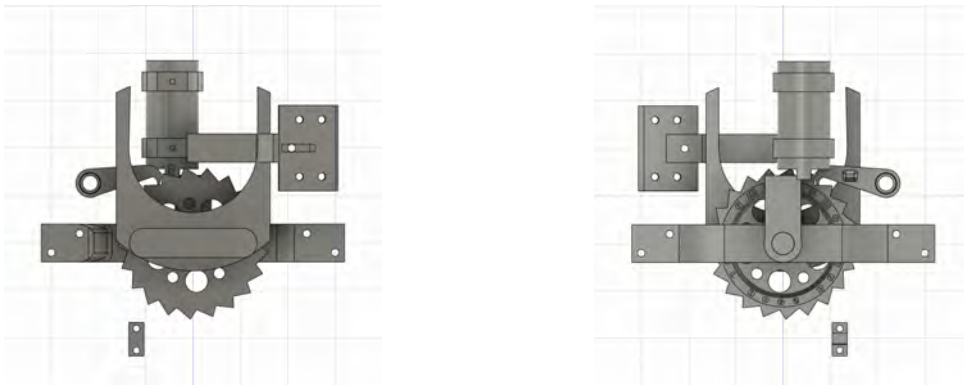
(Left) Front view of the internal moving mechanism for the Gacha prototype. (Right) Back view of the internal moving mechanism for the Gacha Prototype. Image by the authors from the 3D modeling software.
